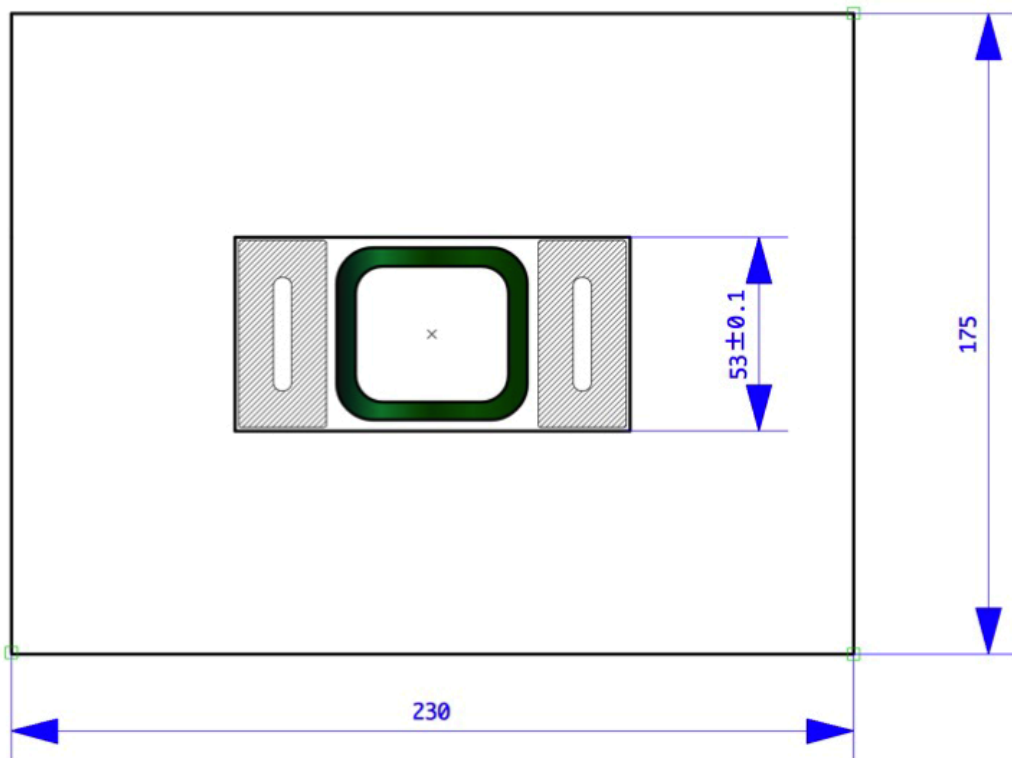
Schematic drawing of the cross-section of DR kicker magnet.
